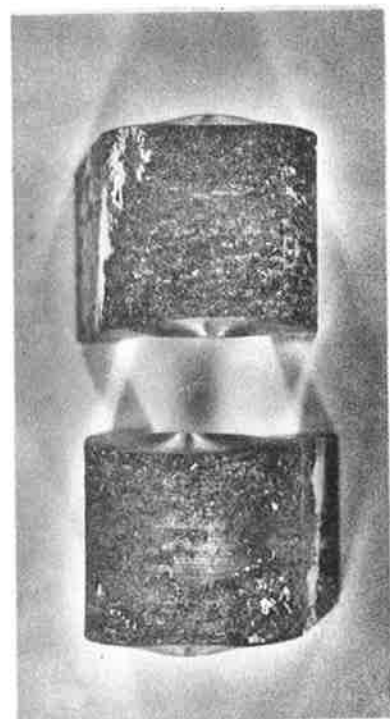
Weld Cross-Section 11A, Taken from Sample K-11 at the Weld Between Shell Courses Numbered 4 and 5.
